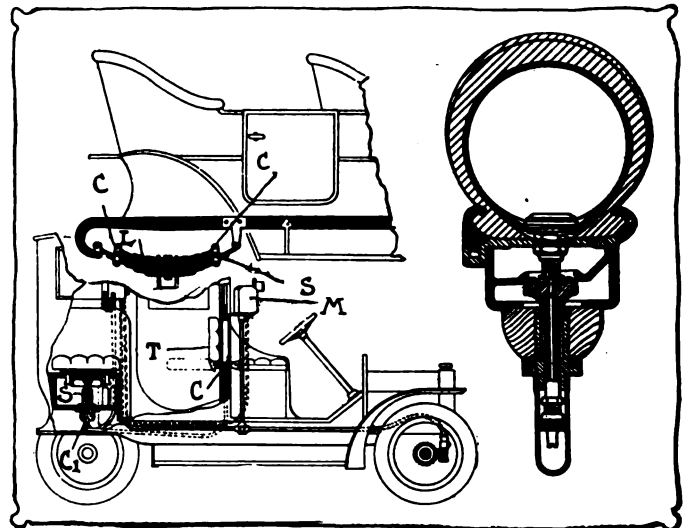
Kaunitz rebound-check spring. Fig. 5—Kuhn-Netter taxicab control. Fig. 6—Booth tire valve
